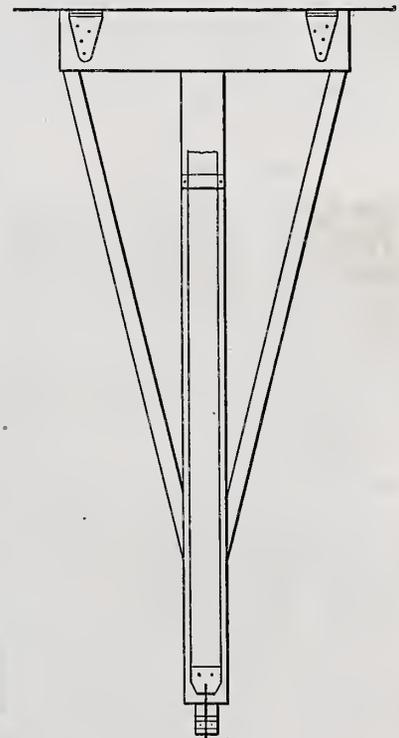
Side View of Machine Opposite to that Illustrated in Fig. 1, showing Jig Saw Attachment.
